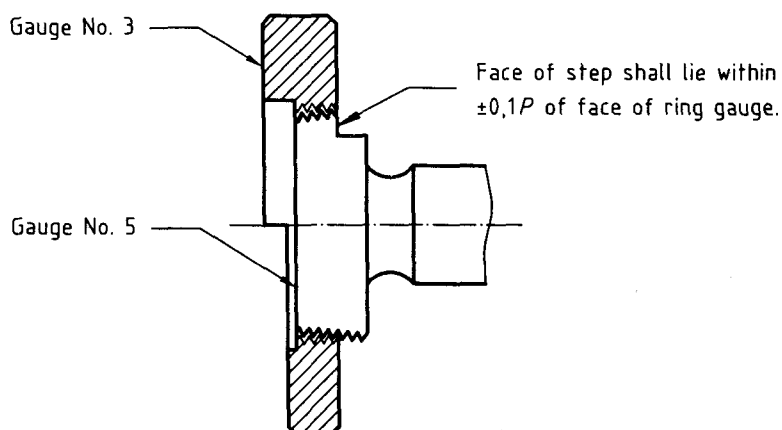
Checking of pitch diameter of new parallel full form threaded ring gauges using taper modified thread form check plug gauges
